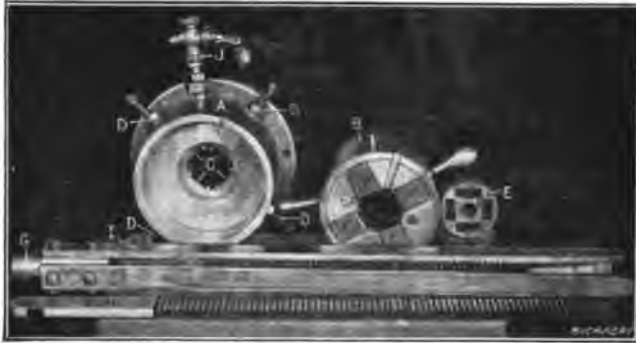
The Broaches and Broaching Fixture used for the Operation Illustrated in Fig. 25
